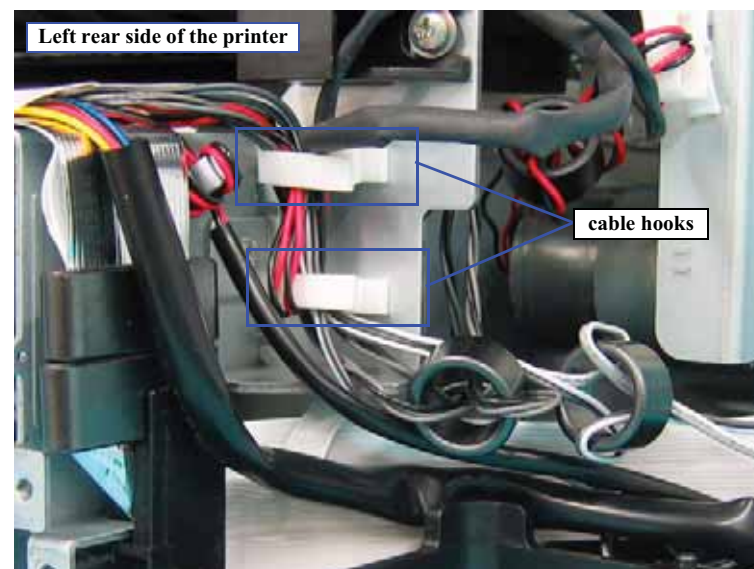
Releasing the LOCK, COVER, ASSY. Cables (1)
